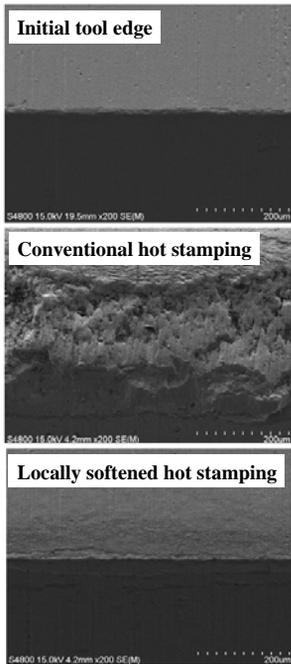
SEM images of damage in the cutting tool edge after trimming
